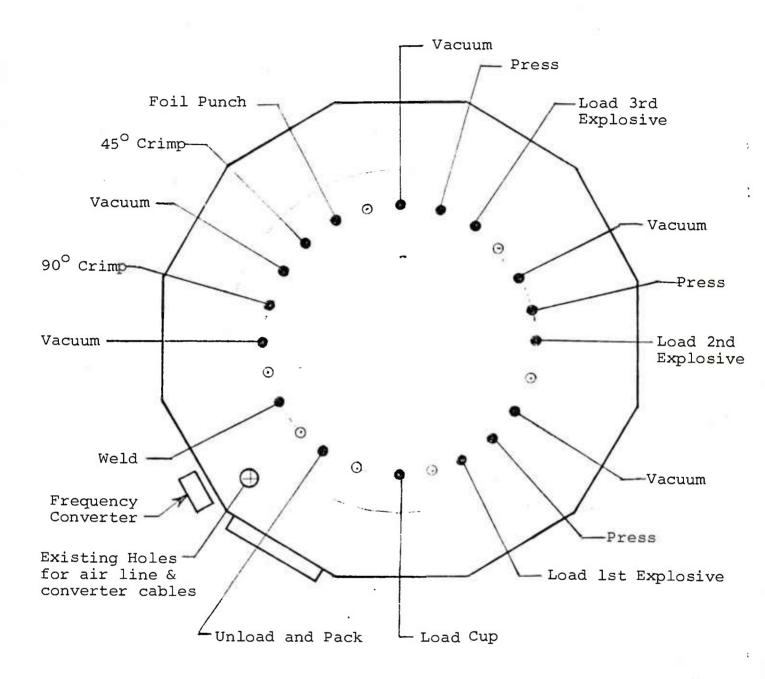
Plan view of Iowa Loader for assembling detonators, with ultrasonic weld station added.
